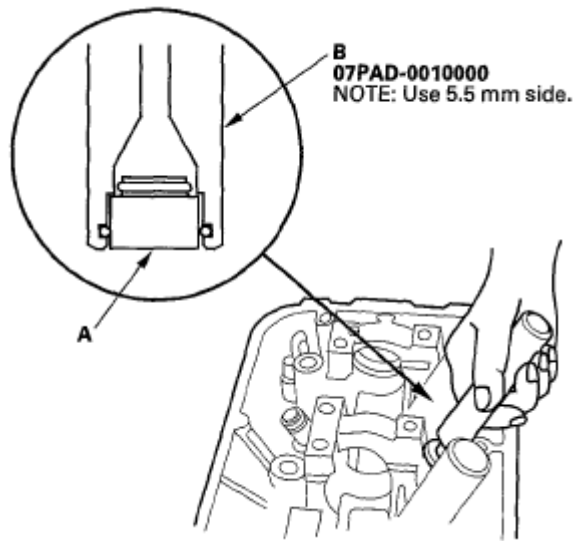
Identifying Valve Seal And Stem Seal Driver
